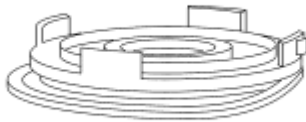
Installing/Removing Forward Clutch Piston Inner Seal On Forward/Coast/Direct Clutch Cylinder Assembly
